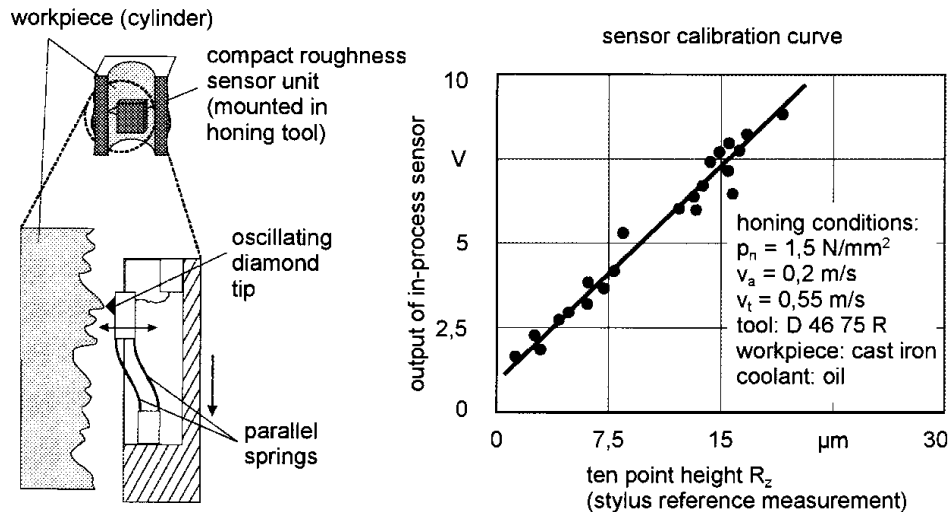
Contact workpiece roughness sensor for ID honing. Source: von See [22]
